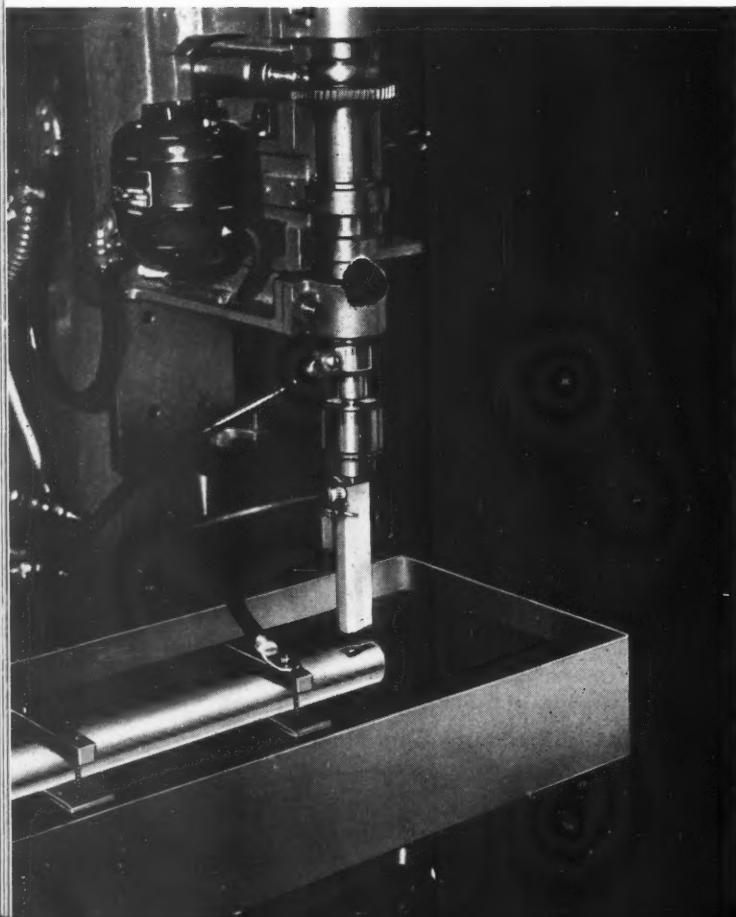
Machine employed for Method X resembles a drill press with a pedestal type base. It is equipped with an electrode feed and control mechanism and a remote unit power supply
